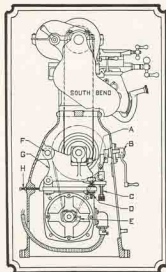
Cross Section End View of the Underneath Belt Motor Drive Precision Lathe. Showing Principal Parts of Drive.
